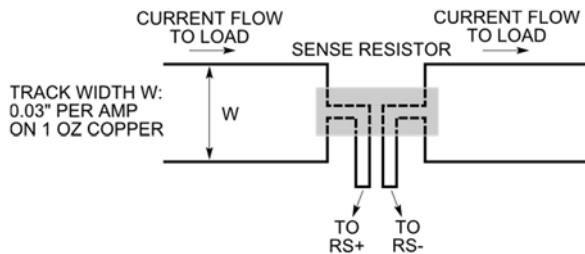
Making PCB Connections to the Sense Resistor (drawing is not to scale).
